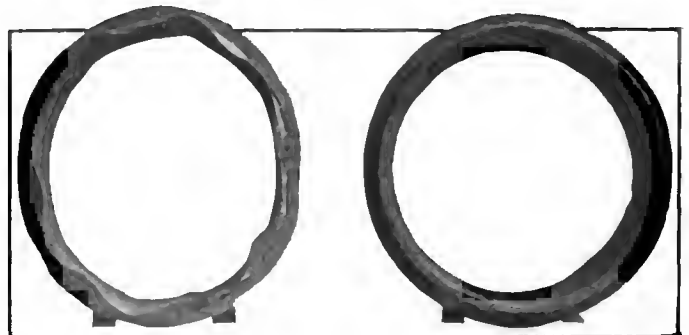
Malleable Iron clutch ring castings tested to prove that carbon particles do not injure the structure of the metal
